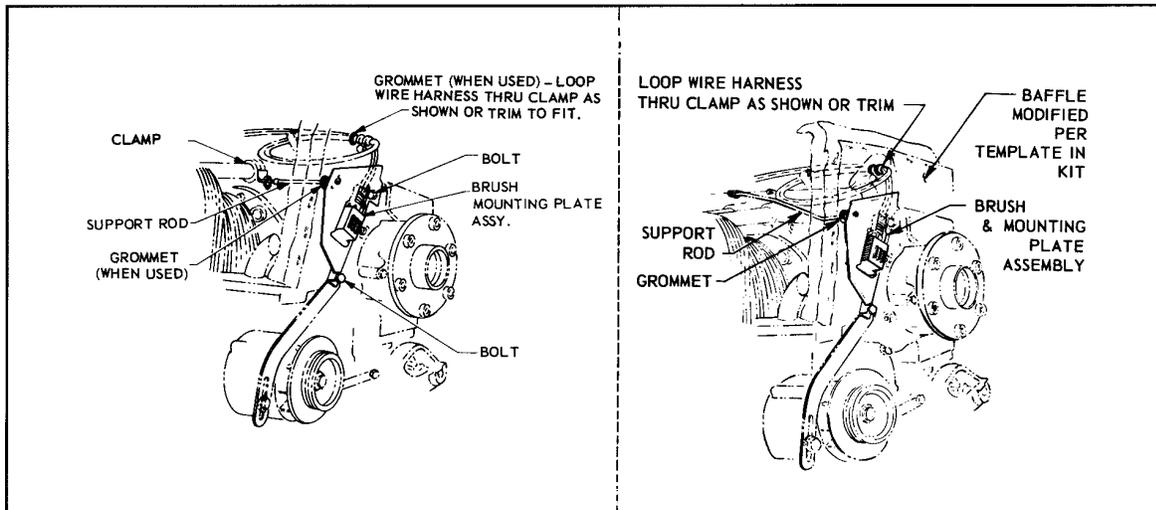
Typical Brush Assembly Mounting Bracket Installations
